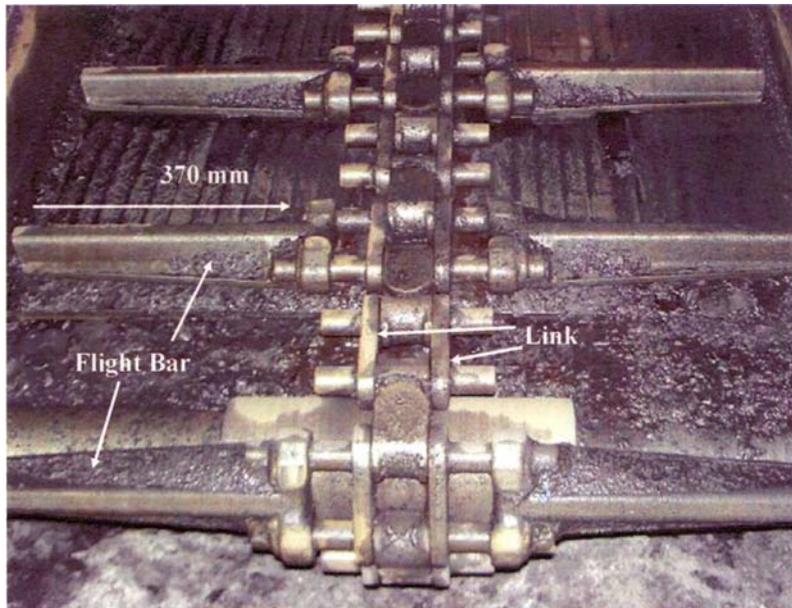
The newly designed dual sprocket chain by JOY Mining Machinery Manufacture.
